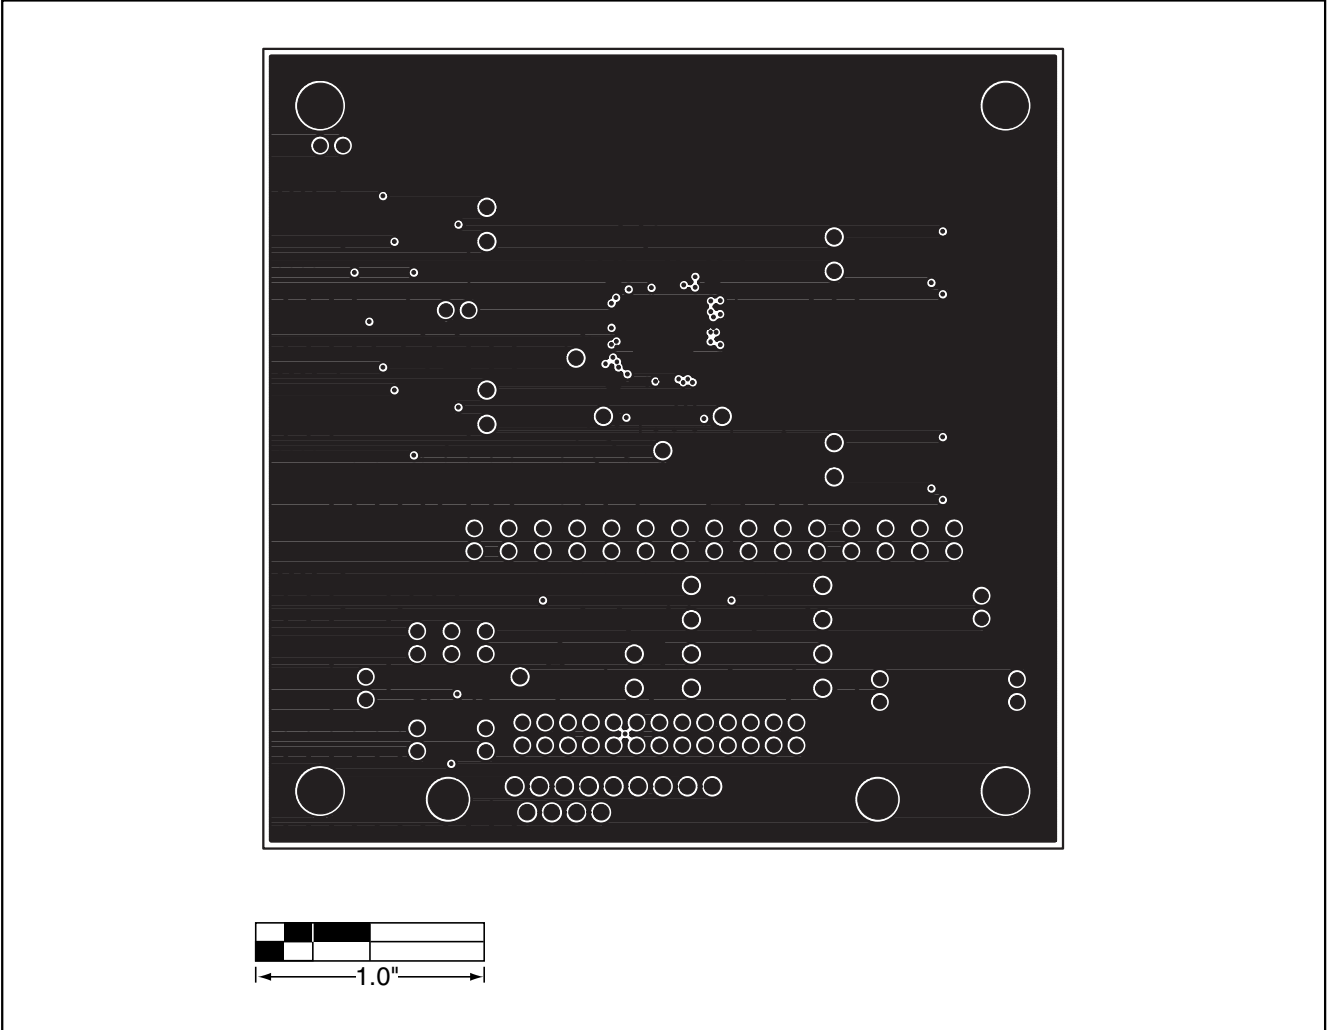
MAX2825/MAX2826/MAX2827 EV Kit PC Board Layout—Inner Layer 2, Gound Layer
